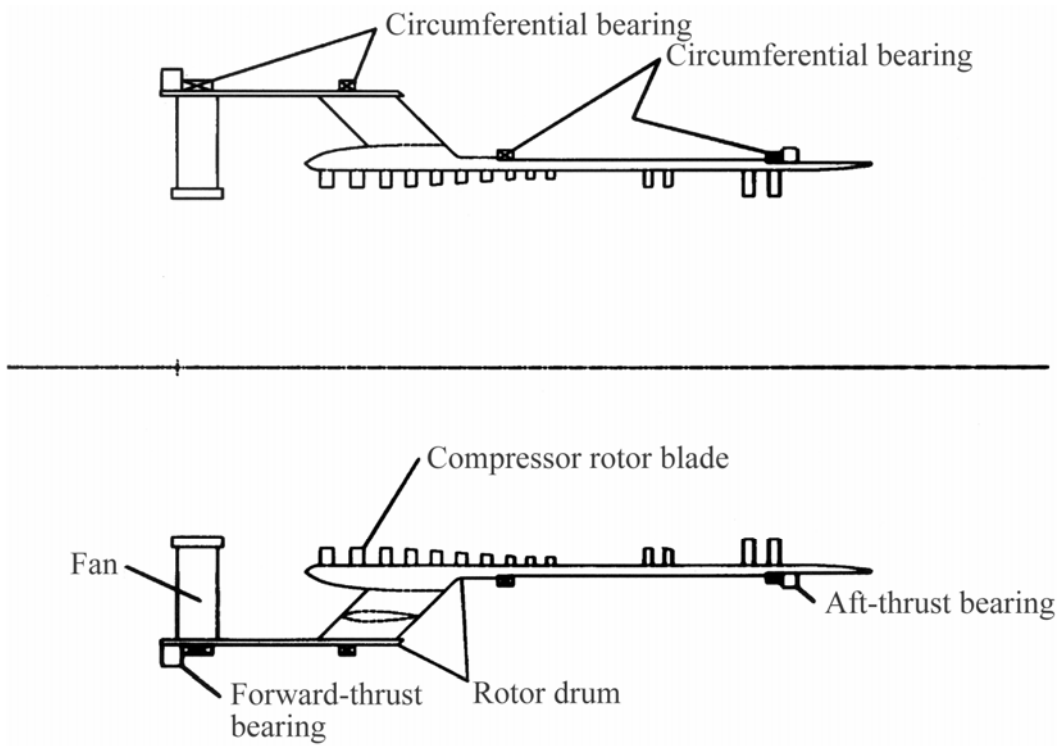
Longitudinal section of exoskeletal engine rotor (drum-rotor) shell.
